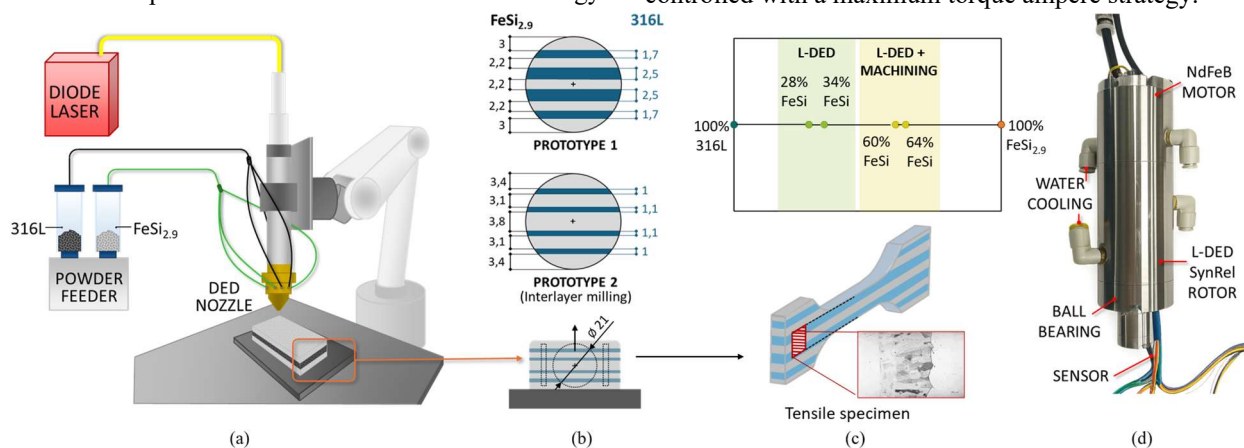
(a) Schematic of DED setup with alternating deposition of $\text{FeSi}_{2.9}$ and 316L; (b) layer thickness distribution in the bimetallic rotor blanks for prototype 1 (L-DED only) and prototype 2 (DED + interlayer machining); (c) geometry of a tensile specimen showing build direction, layer orientation and $\text{FeSi}_{2.9}$ fractions; (d) motor test bench for electromagnetic performance
